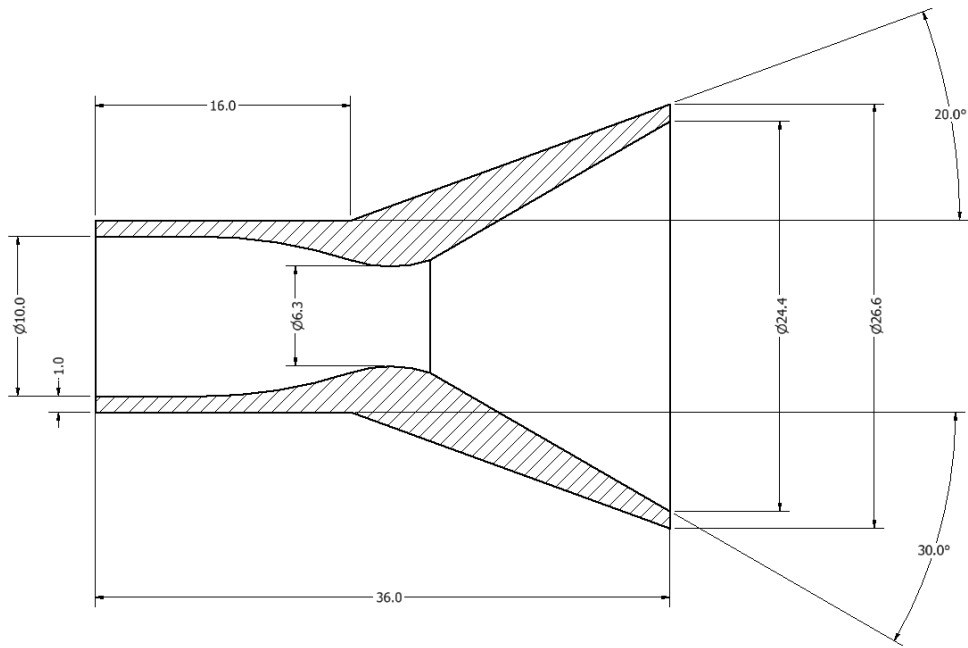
Section 2D technical drawing of the original design for the combustion chamber.
